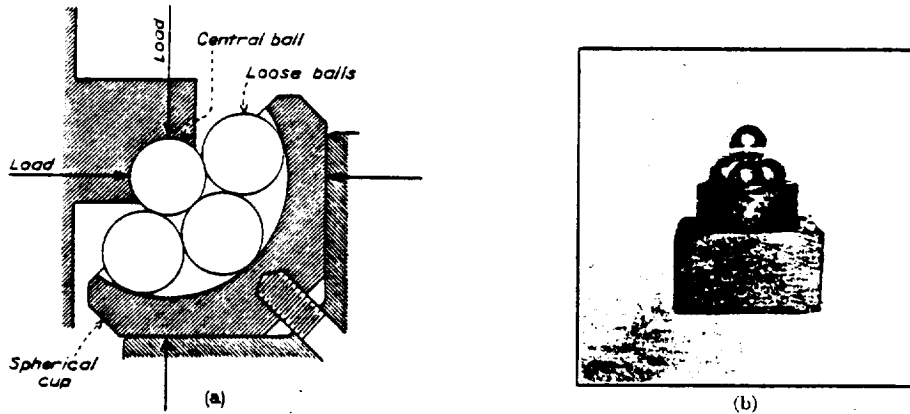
Ball universal joints used in the testing machines (b, type used on large machine for vertical loads only, 1 in. balls, capacity 5,000 lb.)
